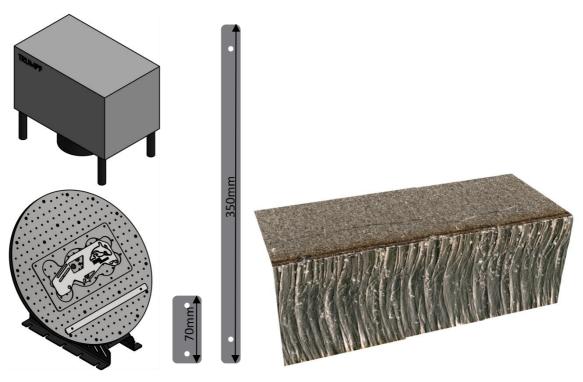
(a) Experimental setup; (b) Samples; (c) Digital 3D image of an edge geometry before deburring (Keyence VHX-5000)
